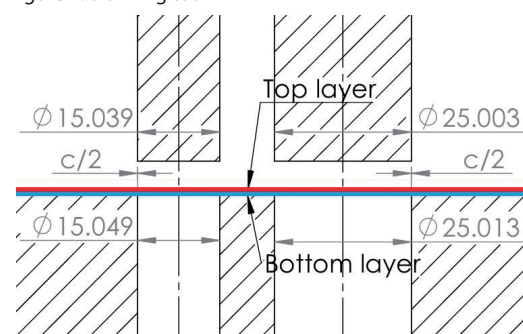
Layout of the double layer configuration (top layer is red and bottom layer is blue)
